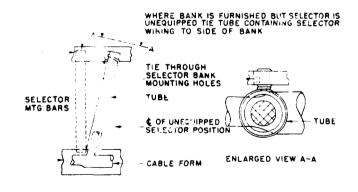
Supporting Unequipped Cable Arms to 26-, 27-, and Similar-Type Banks
